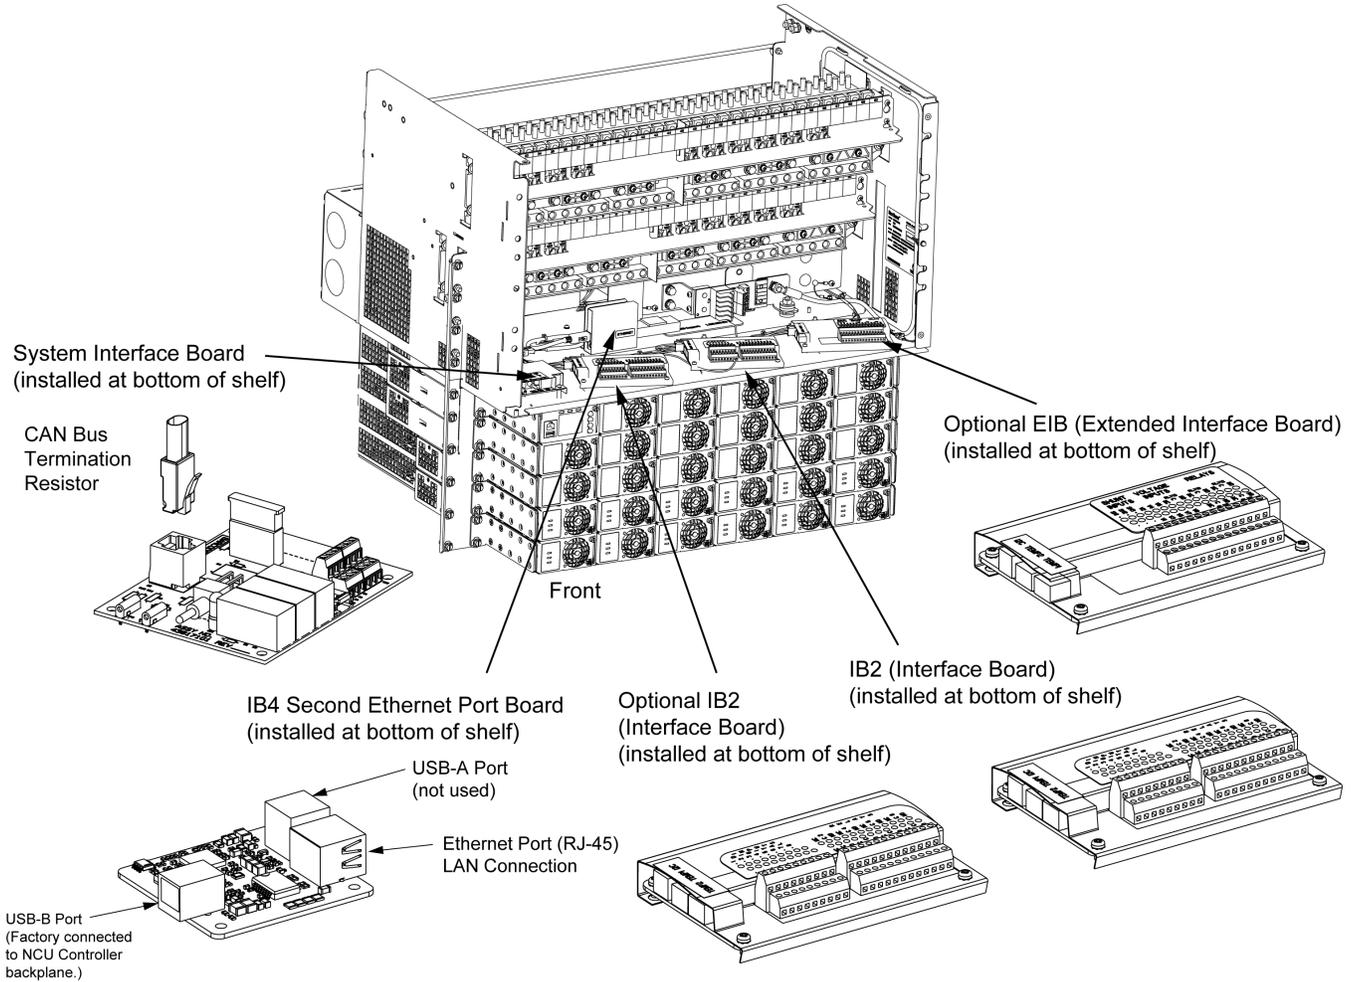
Circuit Card Locations (Lists 600, 601, 900, and 901)
